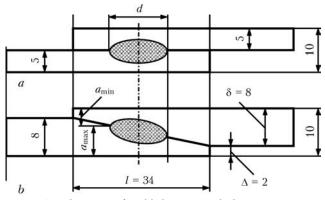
Schematics of welded joints made by resistance spot welding without (a) and with edge preparation (b)
